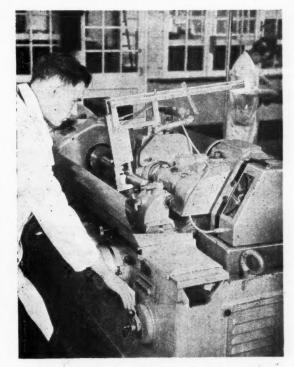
Continuous counterpoise type grinding gauge used on manually controlled cylindrical grinding machines.
